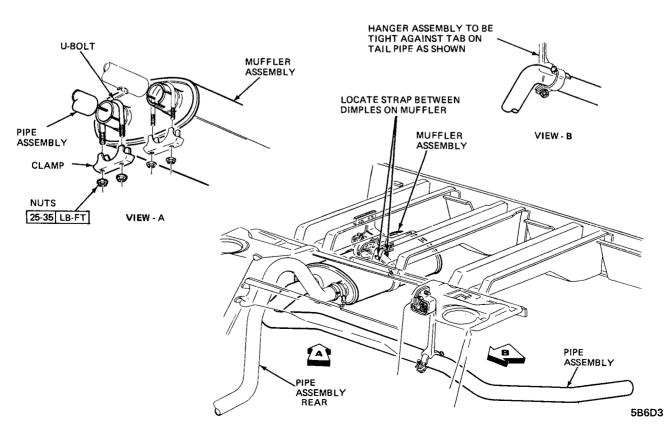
D-3 H Series Muffler and Tail Pipe Assembly
